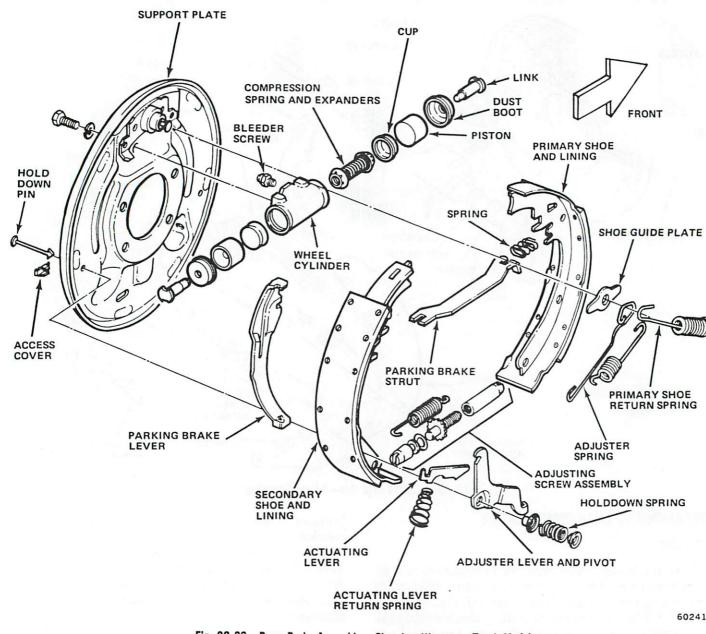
G-26 Drum Brake Assembly—Cherokee-Wagoneer-Truck Models
